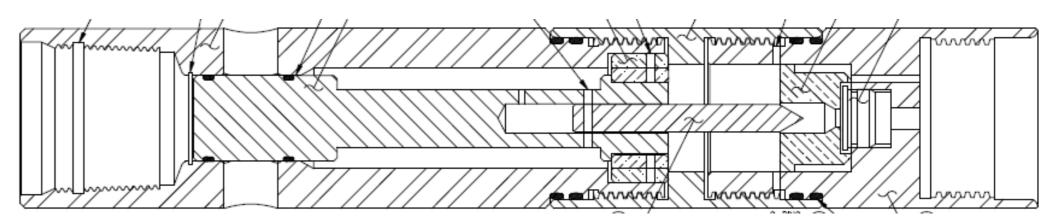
Proprietary Auto-Vent Firing Head Assembly
